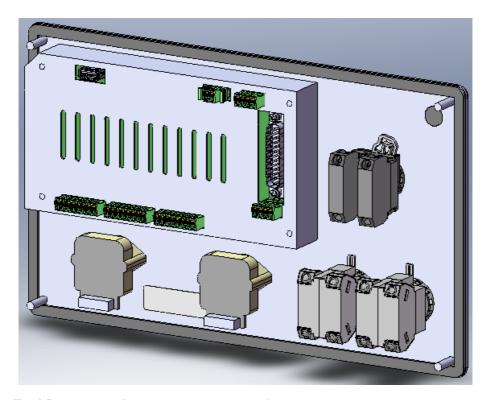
Rear view of VAM82.1 HMI operator panel
